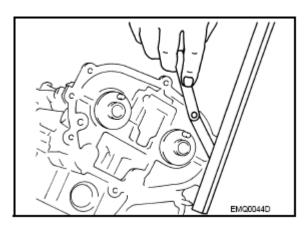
Measuring Difference In Levels Between Front End Faces Of VVEL Ladder Assembly And Cylinder Head Courtesy of NISSAN NORTH AMERICA, INC.
